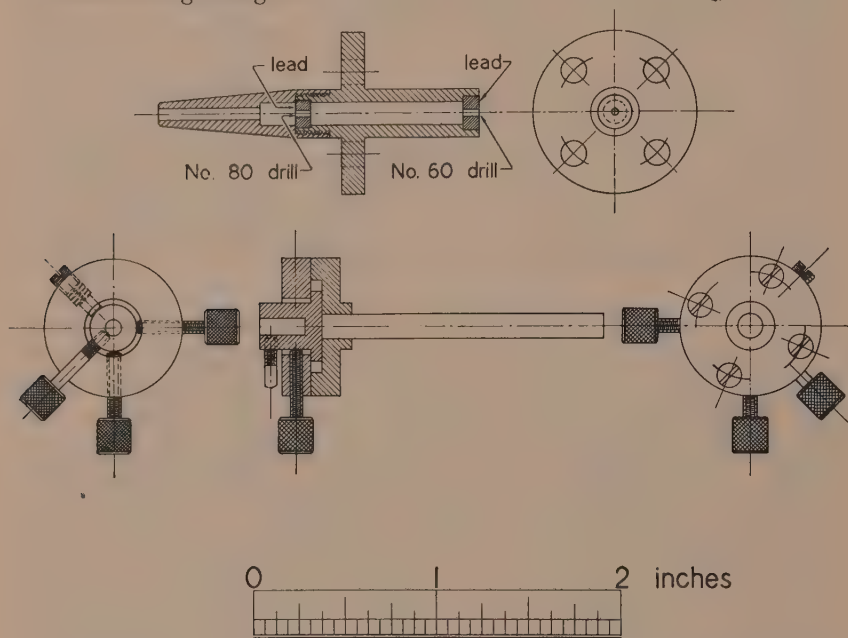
Details of construction of pinhole system (above), and of centering specimen holder (below).
